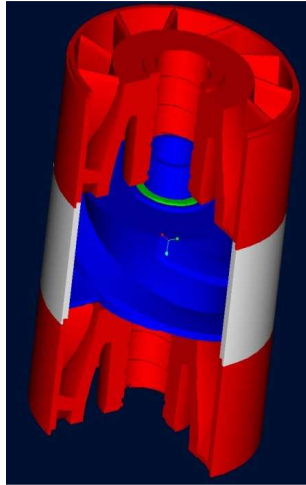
Axial flow impeller in multiphase helicoaxial pump stage, cutaway view.
